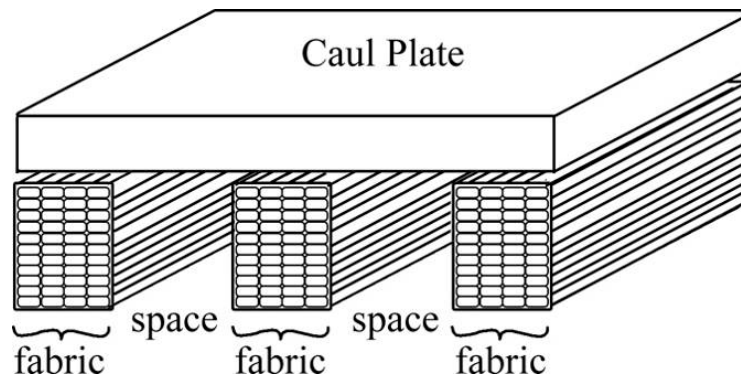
Schematic for sandwich test specimen between the vacuum bag material and the aluminum mold.
